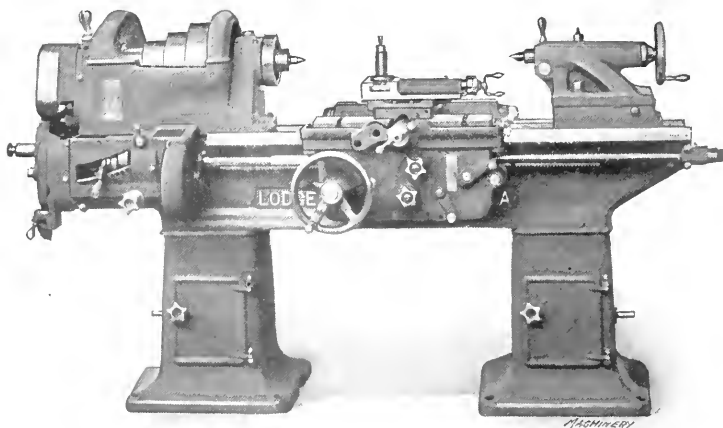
Lodge & Shipley Tool-room Lathe with Cone-head Drive
